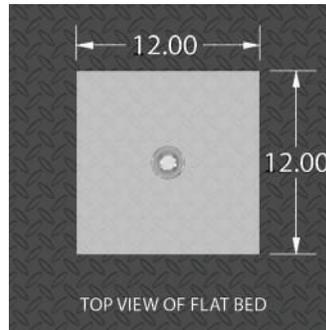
Top view: Recommended that the Shift Lock coupler have a minimum clearance of 12"x 12".
